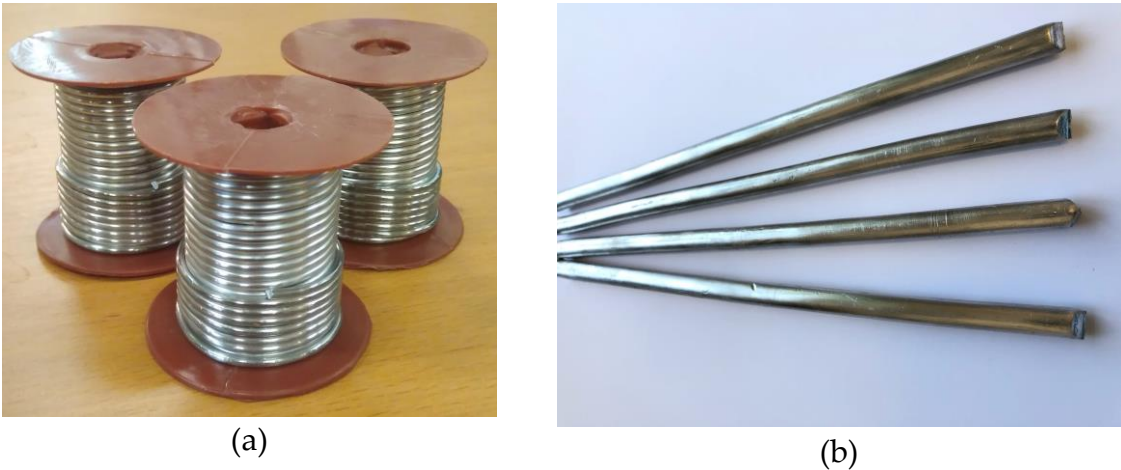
52In-48Sn alloy solder: (a) wire Ø2.0 mm; (b) rod Ø8 mm
